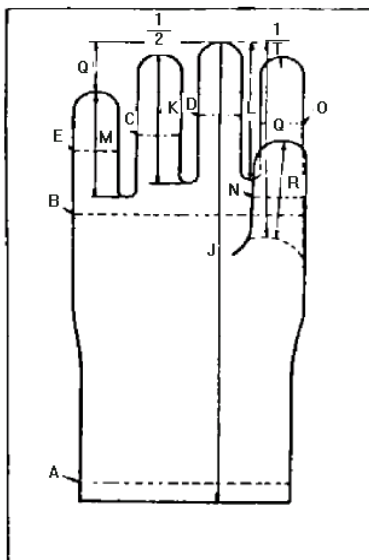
OUTLINE OF TYPICAL STANDARD GLOVE (INTERNAL DIMENSIONS)
